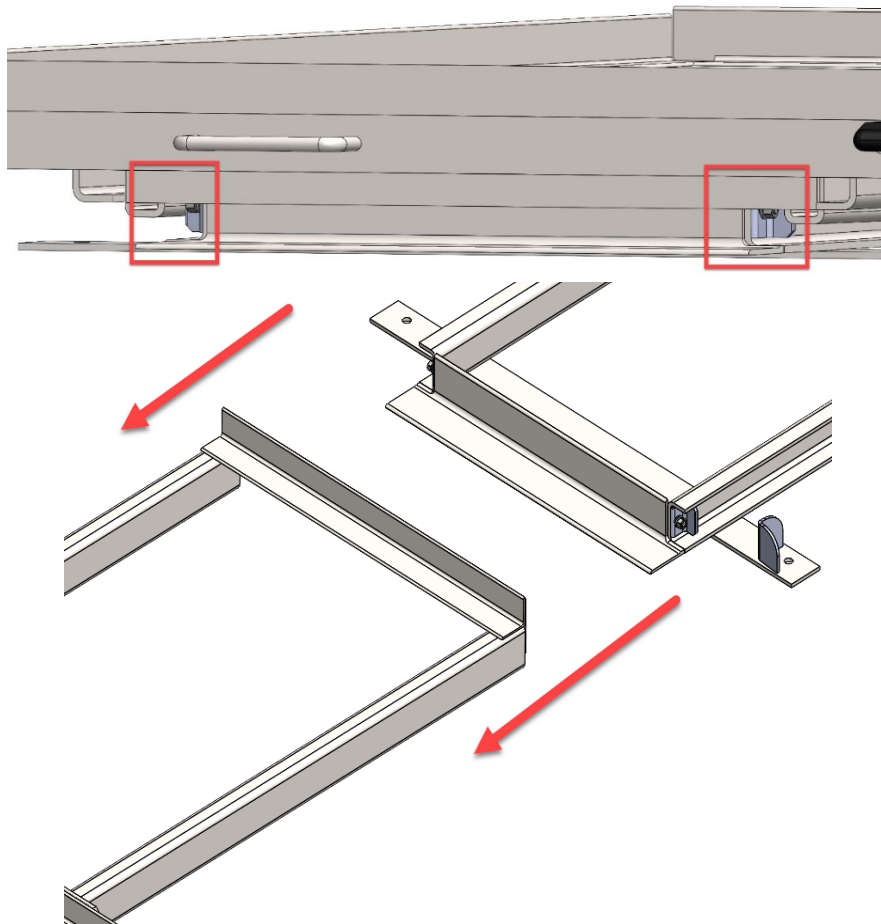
GM EBL Transfer and Cargo Frame Removal.
